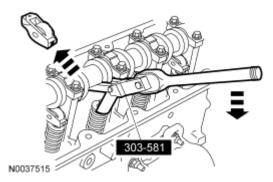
Installing Special Tool Between Valve Spring Coils Courtesy of FORD MOTOR CO.
